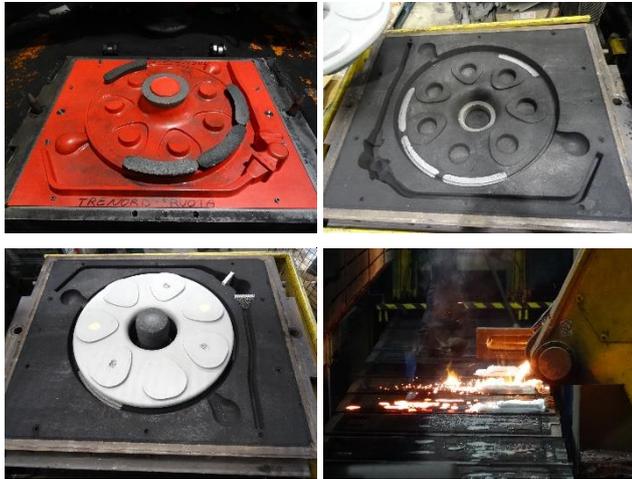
Different stages of casting process. Top left: lower side of the wooden model (with chillers). Top right: the mating "negative" sand mould. Bottom left: the same with inserted cores. Bottom right: pouring molten cast iron inside the mould.
